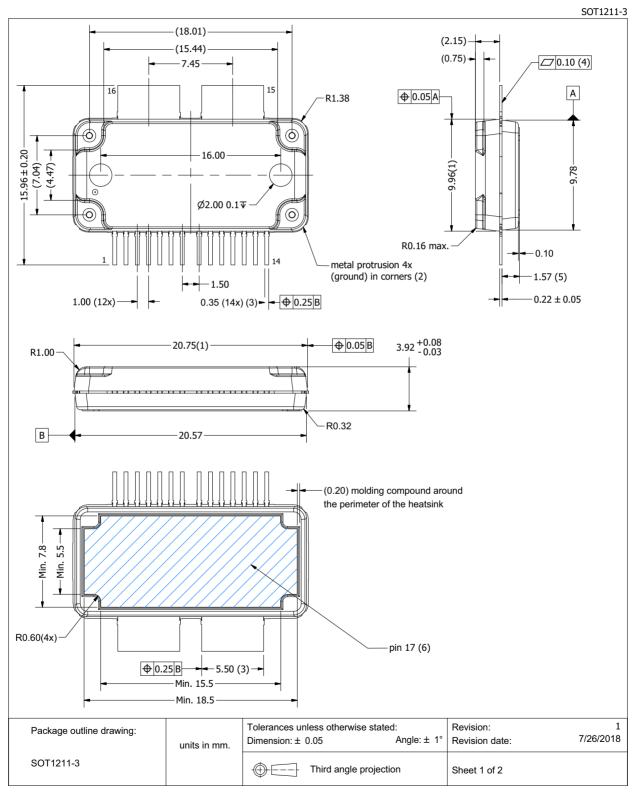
Package outline SOT1211-3 (sheet 1 of 2)
